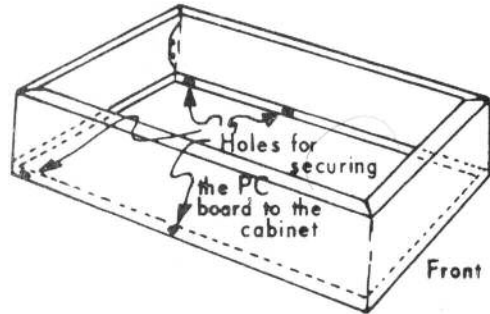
Holes in bottom lip for mounting P.C. board to cabinet.
